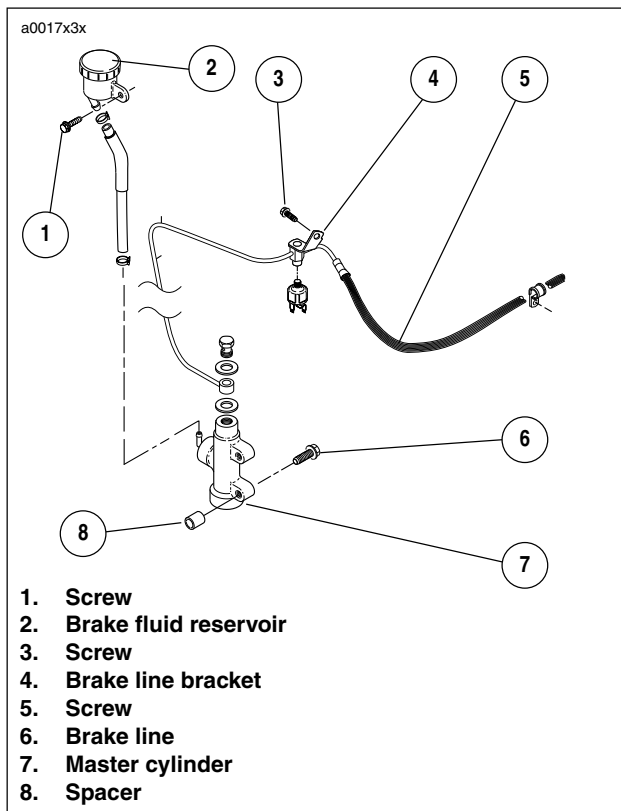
Rear Master Cylinder and Brake Line Assembly
